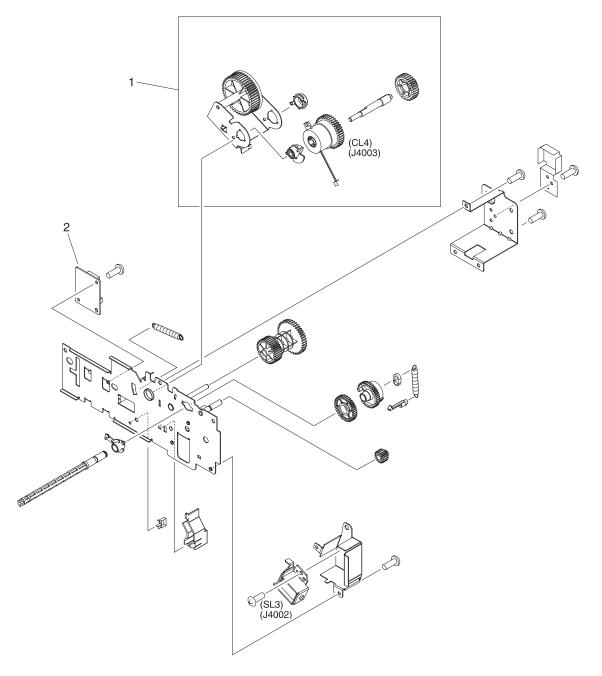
500-Sheet paper feeder paper pick-up drive assembly
